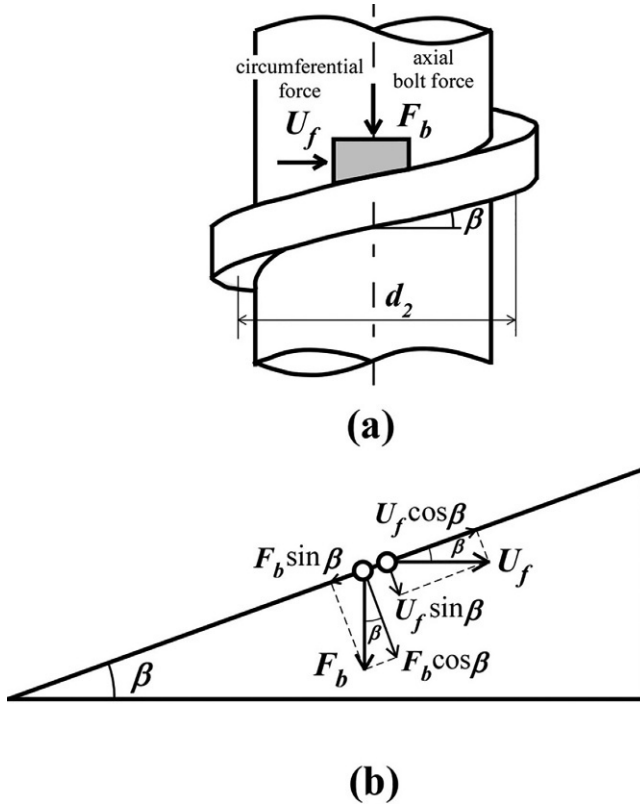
Equilibrium of forces on thread surface in square screw threads. (A) Forces exerted on thread surface and (B) equilibrium of forces along and perpendicular to thread surface.
